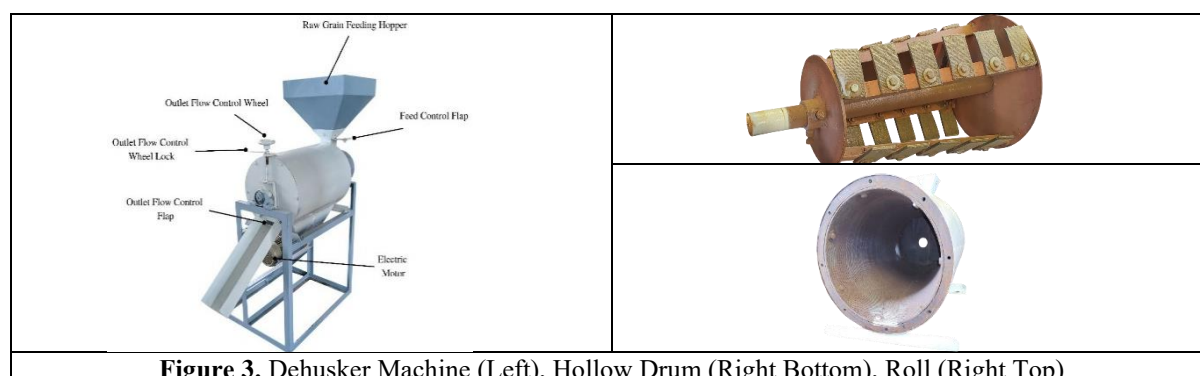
Dehusker Machine (Left), Hollow Drum (Right Bottom), Roll (Right Top)
